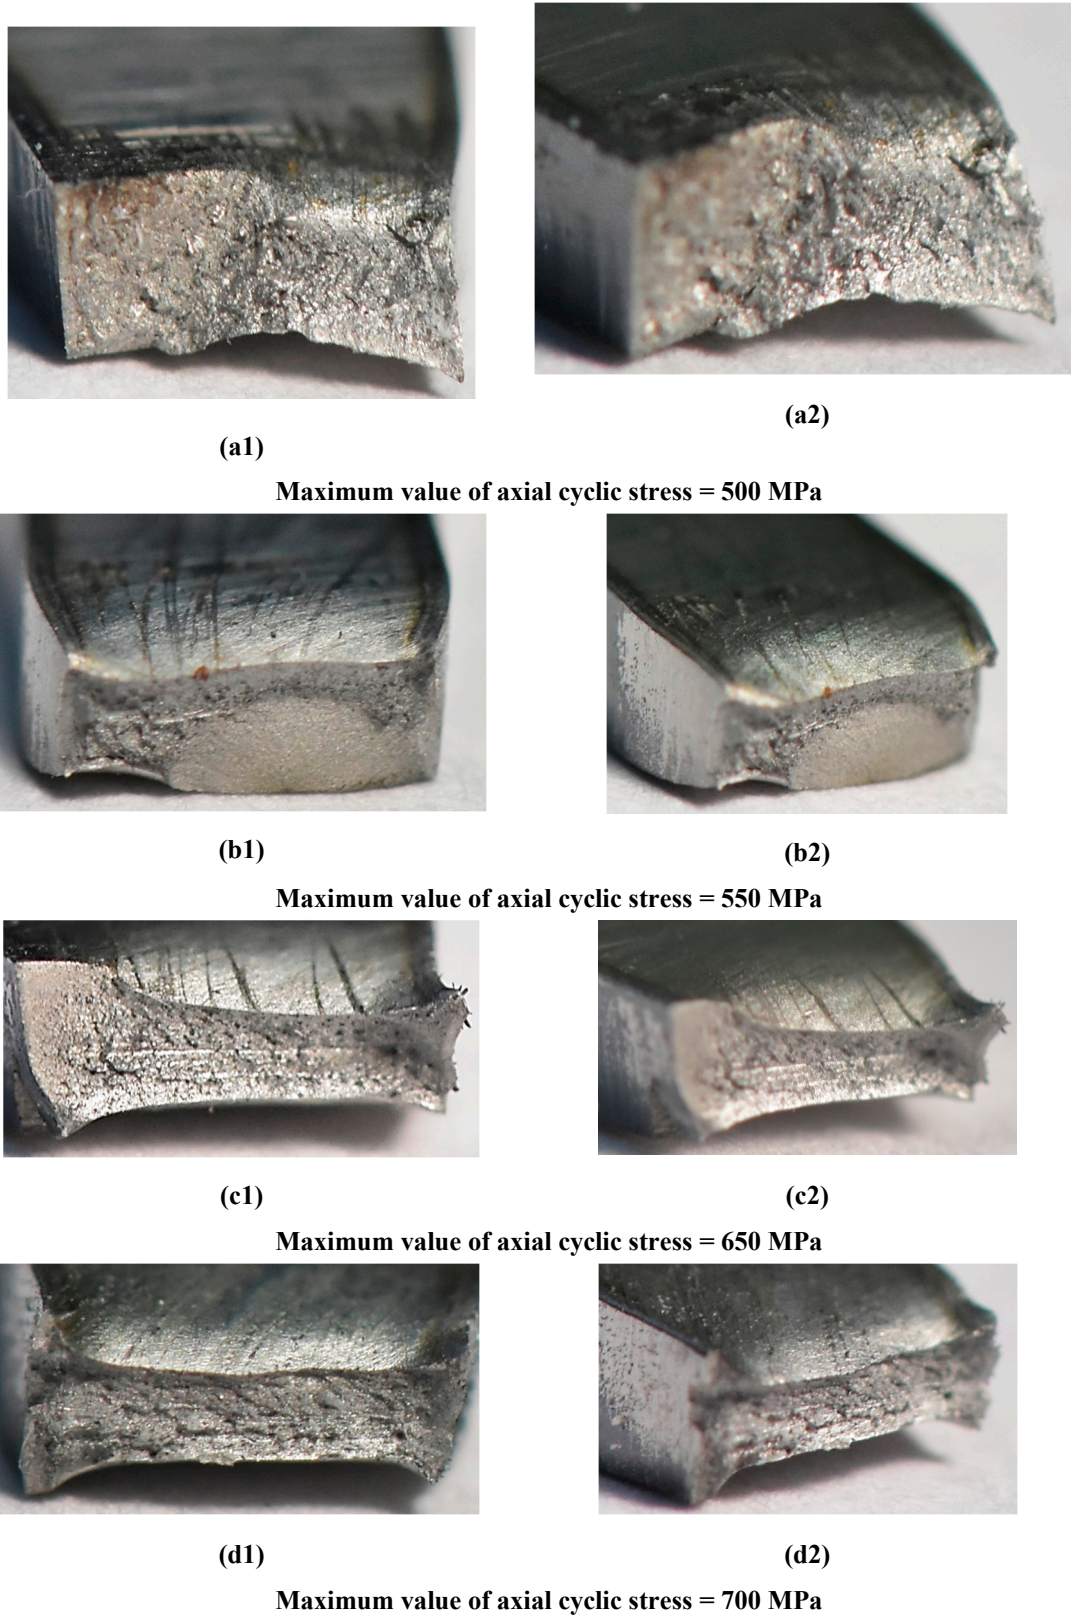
Fracture zones of the Docol 1200 M weld manufactured at the micro-jet cooling technique after fatigue test under the maximum values of stress of 500 MPa to 700 MPa.
